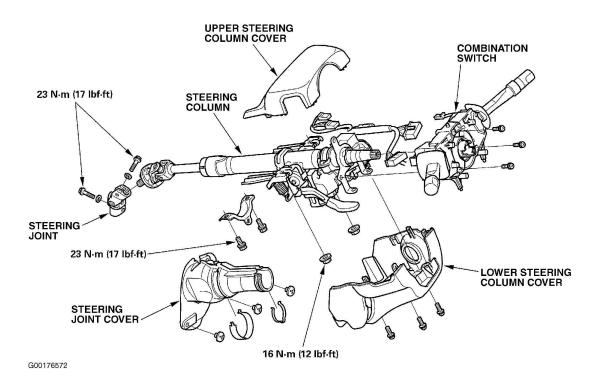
Exploded View Of Steering Column (3.2CL & 3.2TL) Courtesy of AMERICAN HONDA MOTOR CO., INC.
